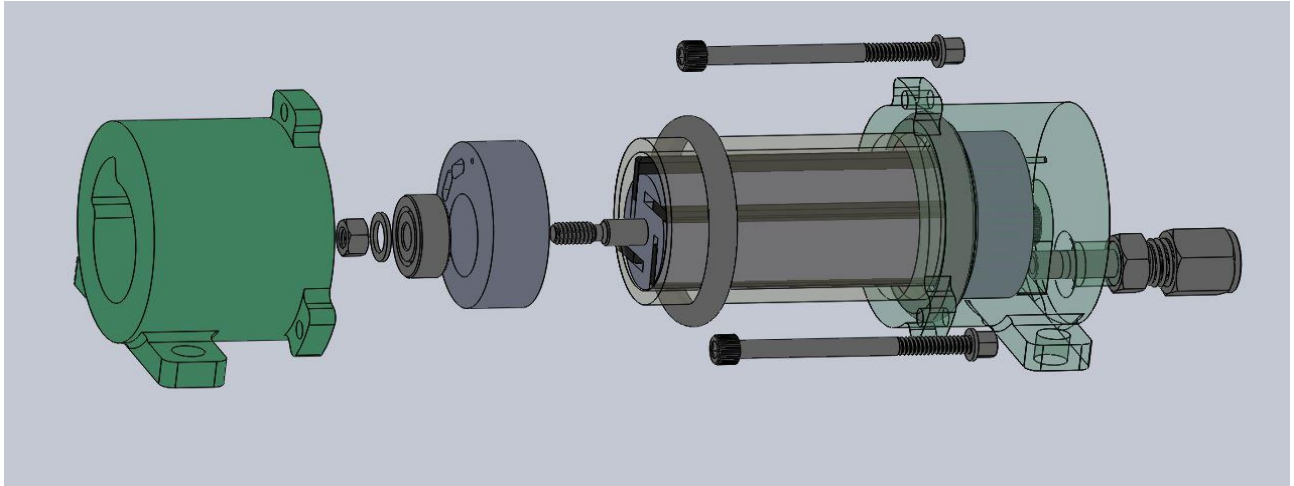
RVE ceramic chamber prototype, exploded SolidWorks view
